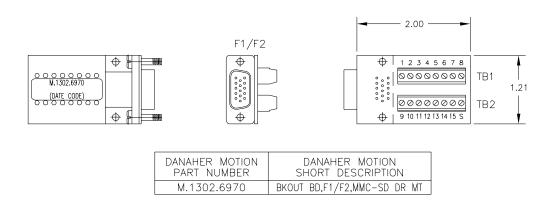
Feedback Port (F1 and F2) Breakout Board Dimensions
